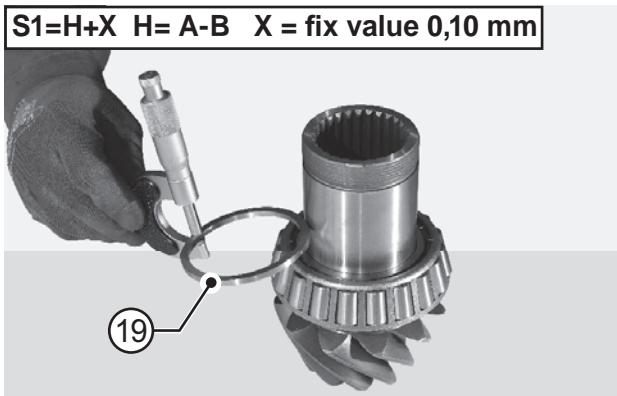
Deviation “H” must be added to a set value of 0,10 mm to obtain calibrated shim “S1” (14) for insertion between inner bearing cone (4) and spacer (15). Dimension “S1” must be rounded off to the higher 5/100. EXAMPLE: $S1=H+X= 1,8 + 0,1 = 1,9 \text{ mm}$
